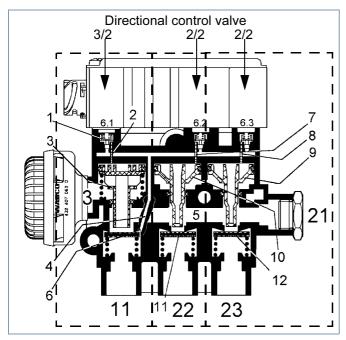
Cross-section view of an ECAS solenoid valve with spring-returned seat valves for the driving axle (solenoid block ECAS-II solenoid valve)
